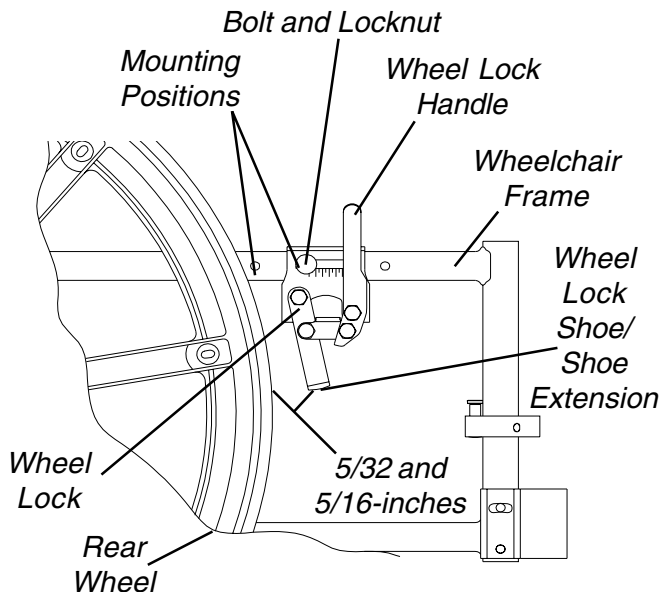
ADJUSTING THE PATIENT OPERATED WHEEL LOCK
